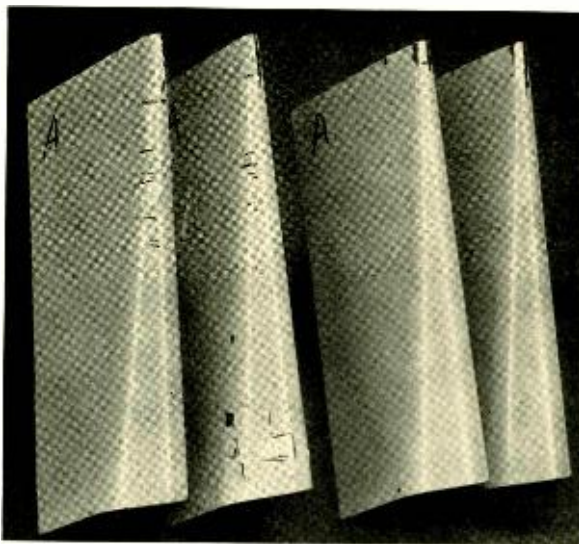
To prevent the drawbar of the testing machine from injuring the finish, sheets of Kraft paper lubricated with talc are used between the roller and the specimen. The four specimens illustrated were identical but the two shown at the left were tested without the use of slip papers
